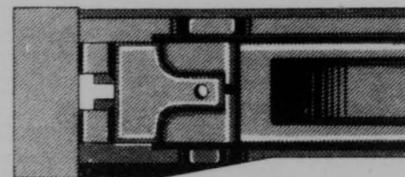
Rear End of Bolt Showing Integral Accelerator Stop—Bottom View.
